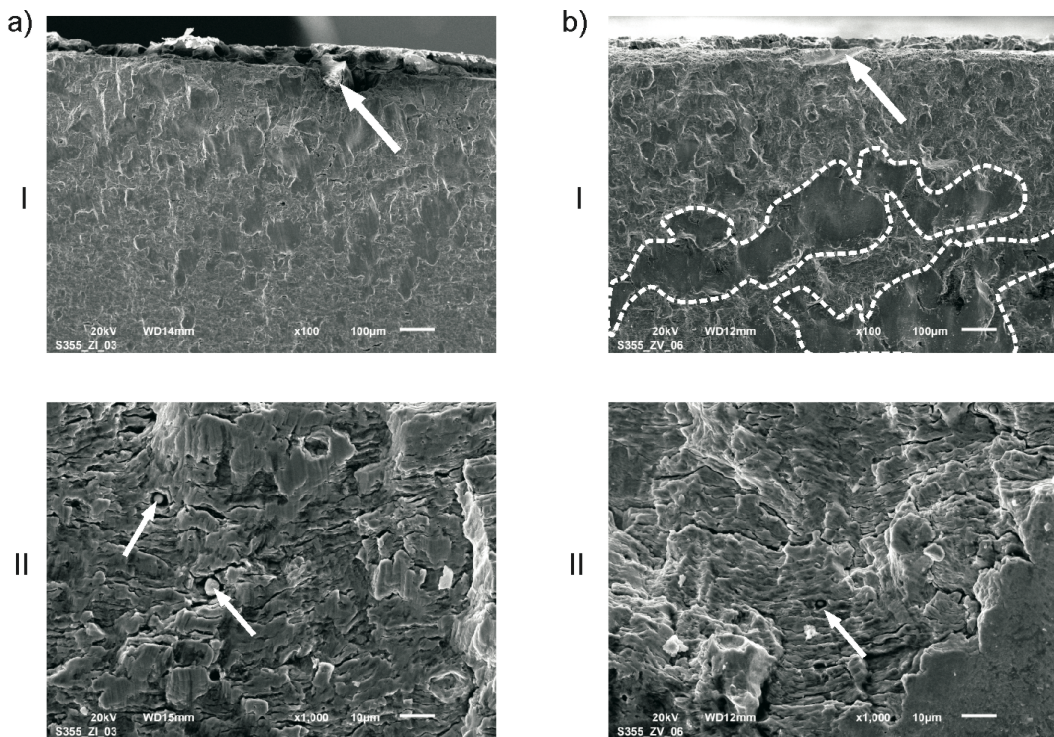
Fatigue fractures of welded joints made of S355J2 steel with I-joint (a) and V-joint (b) tested at  $\epsilon_{ac} = 0.25\%$
